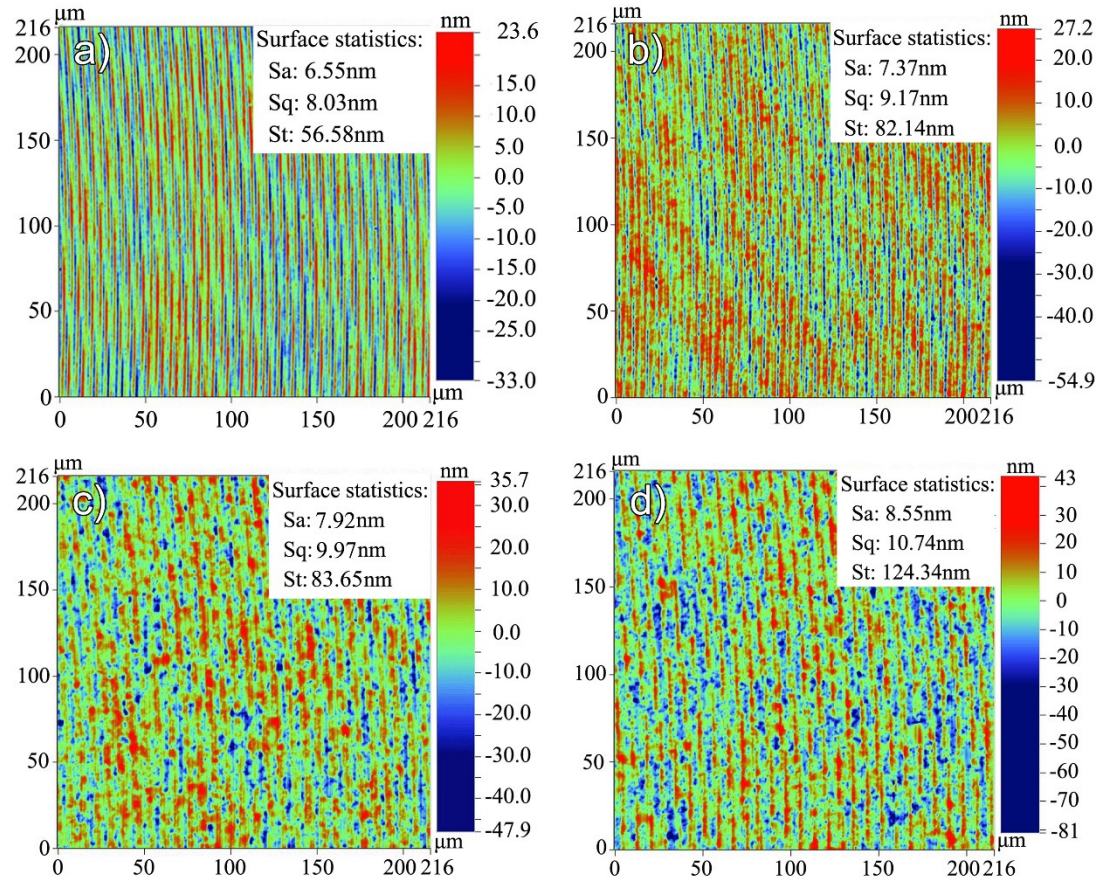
Surface topography of the machined cemented carbides: (a) Binderless WC; (b) WC/8Co; (c) WC/15Co; (d) WC/20Co
